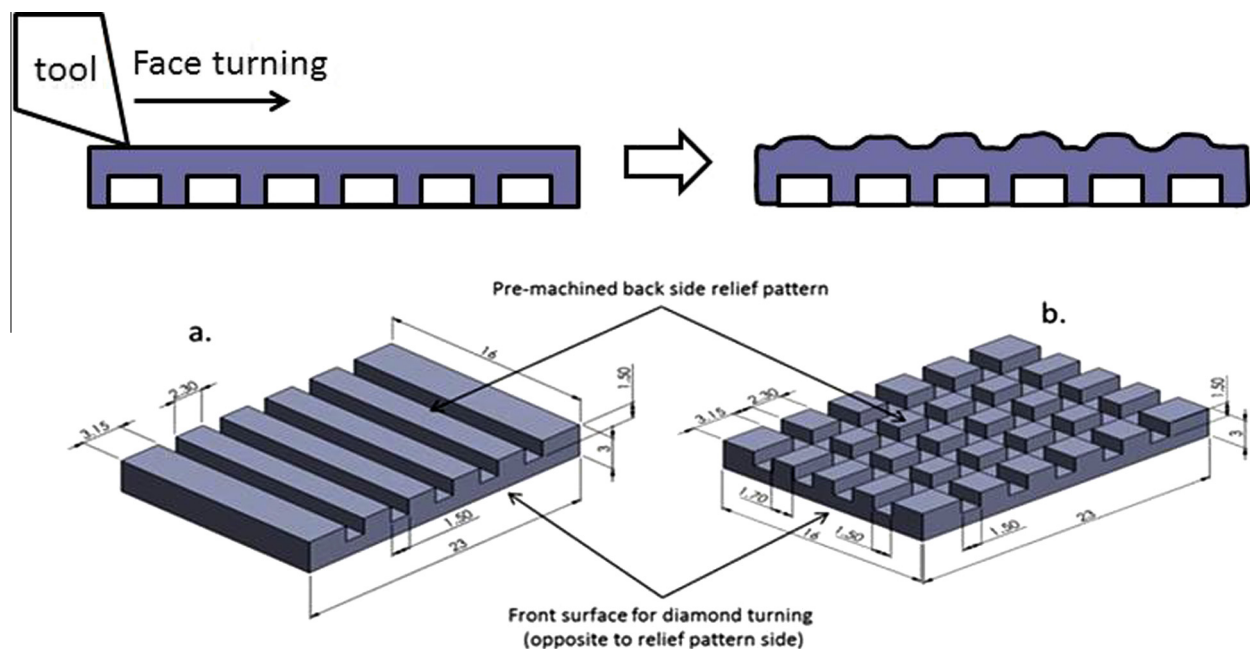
(Top) Basic concept of the texturing method. (Bottom) Schematic of pre-machined Al 6061 workpiece, showing pattern generated using wire EDM cut (a) rectangular grooves and (b) array grooves on back side of the workpiece. (All dimensions are in 'mm').
